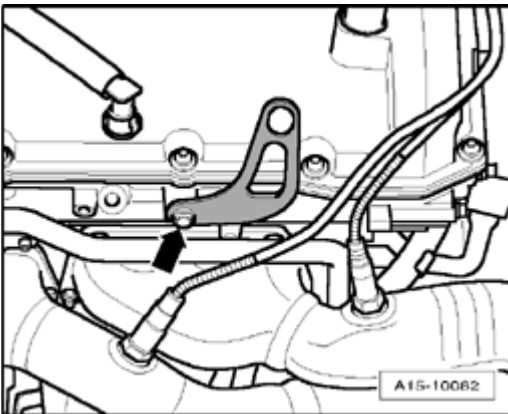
Left Rear Engine Lifting Eye & Bolt
